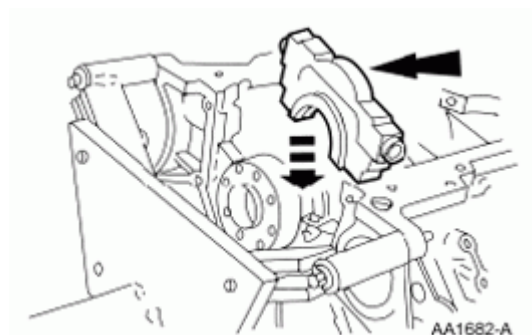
Installing Thrust Washer On Main Bearing Cap
